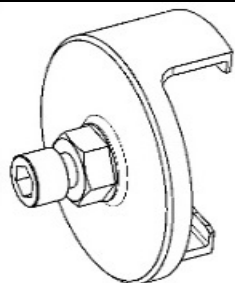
W936589053300 – High Pressure Pump Gear Puller
